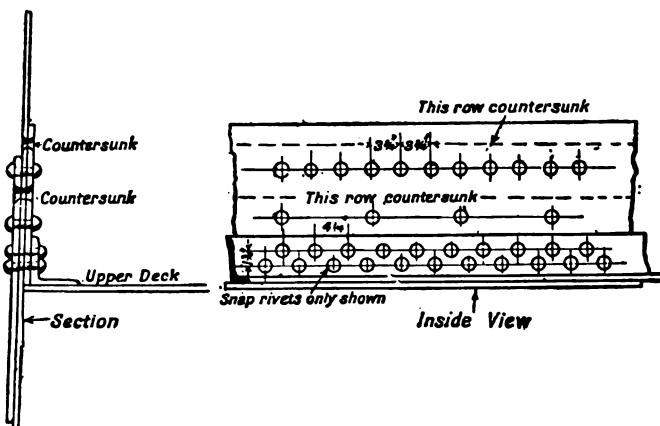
Detail of Hydraulic Riveting in Upper Deck Sheer Strake.
